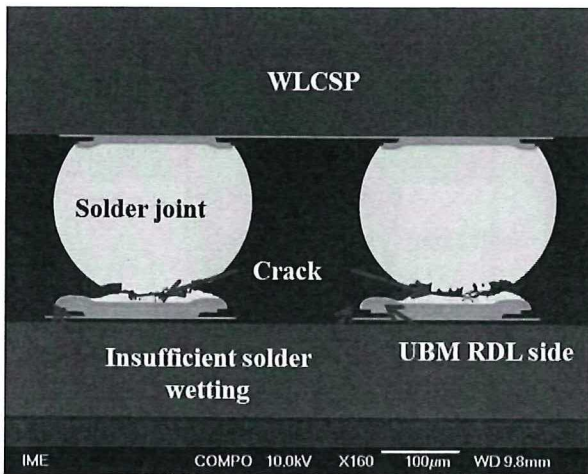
Failure mechanisms of the package edge solder joint of top WLCSP with details of crack on solder joint at RDL side.
